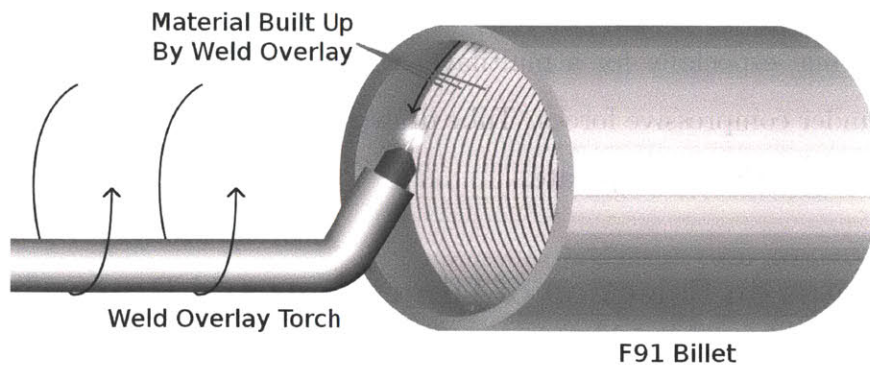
Diagram showing how weld overlaying works. To weld overlay the ID of a billet, a TIG torch is rotated inside the bore, or the billet turns around the torch. It deposits a spiral layer of material, with adjacent weld beads overlapping each other. The billet is turned as the torch is slowly retracted. Multiple layers can be deposited on top of each other to increase the thickness of the coating.
